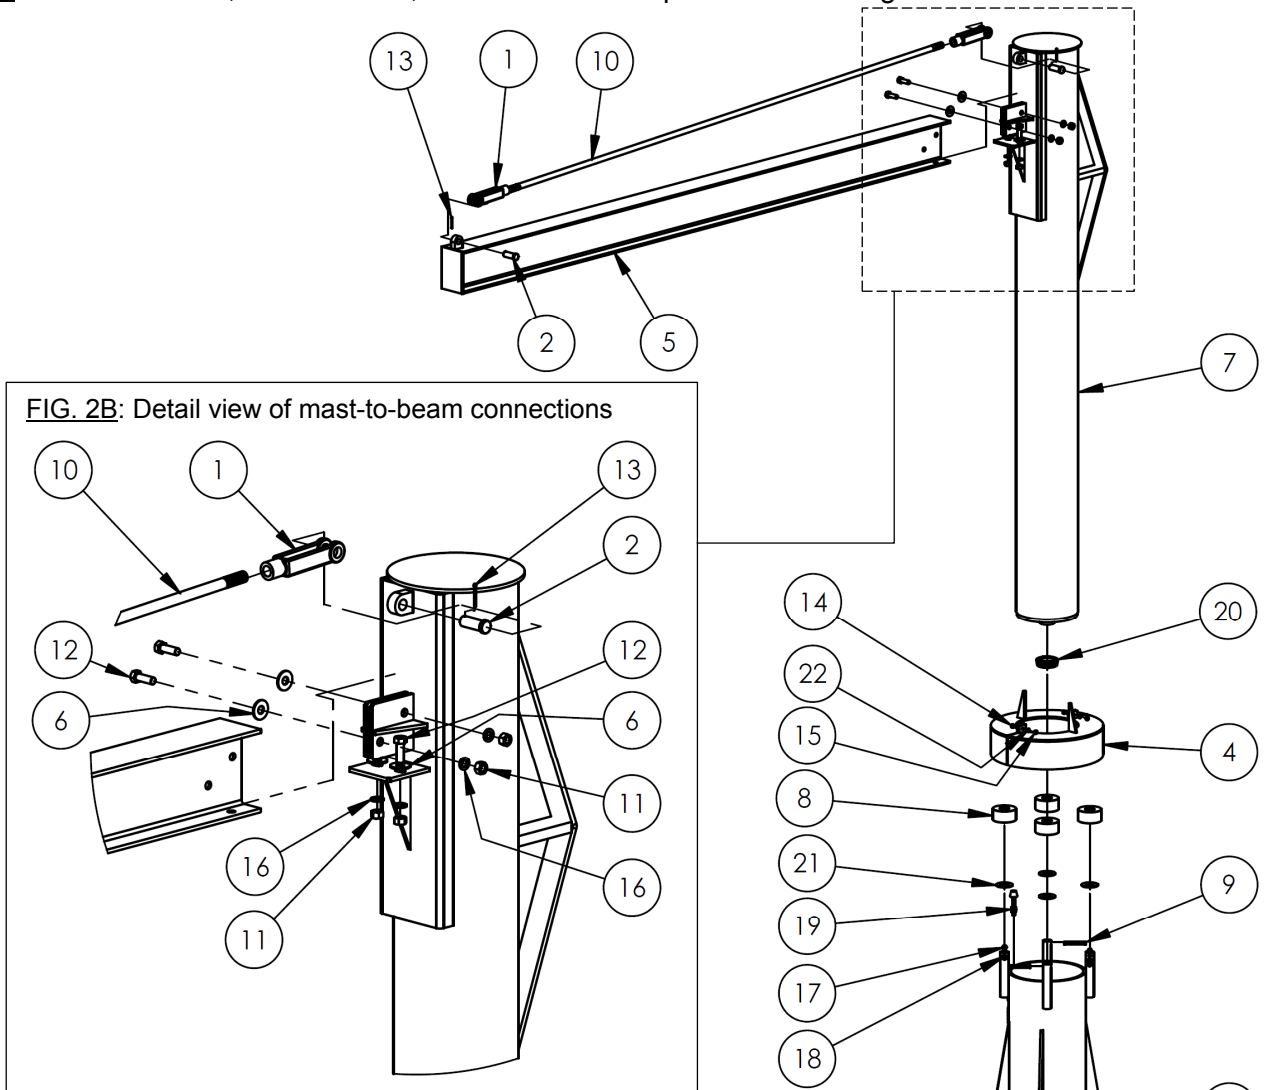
A: JIB-P-10-8-10, JIB-P-10-8-8, & JIB-P-10-8-6 Exploded Parts Diagram and Bill of Materials
